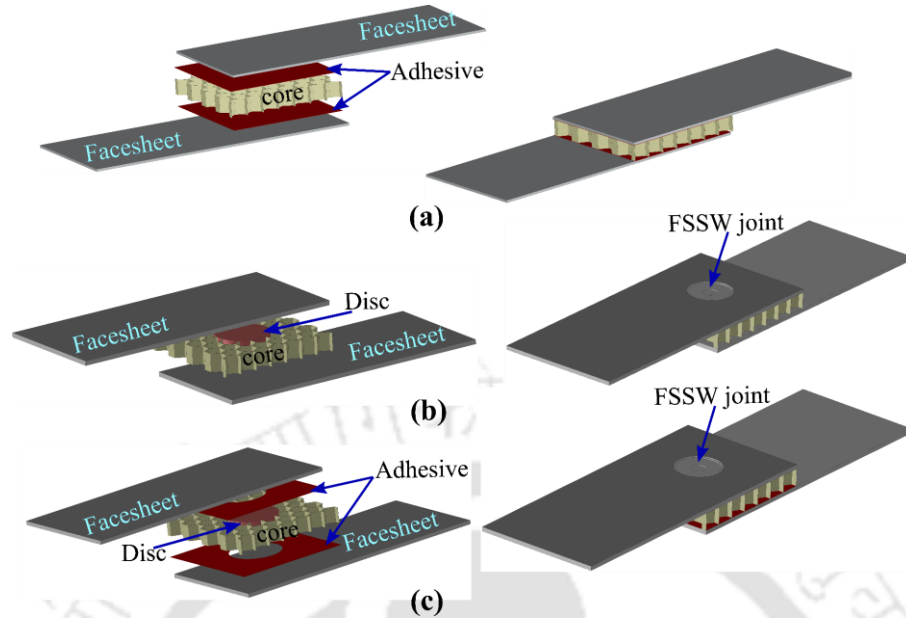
Fabrication of lap shear sandwich sheets by (a) AB (b) FSSW_D (c) FSSW_D_AB
